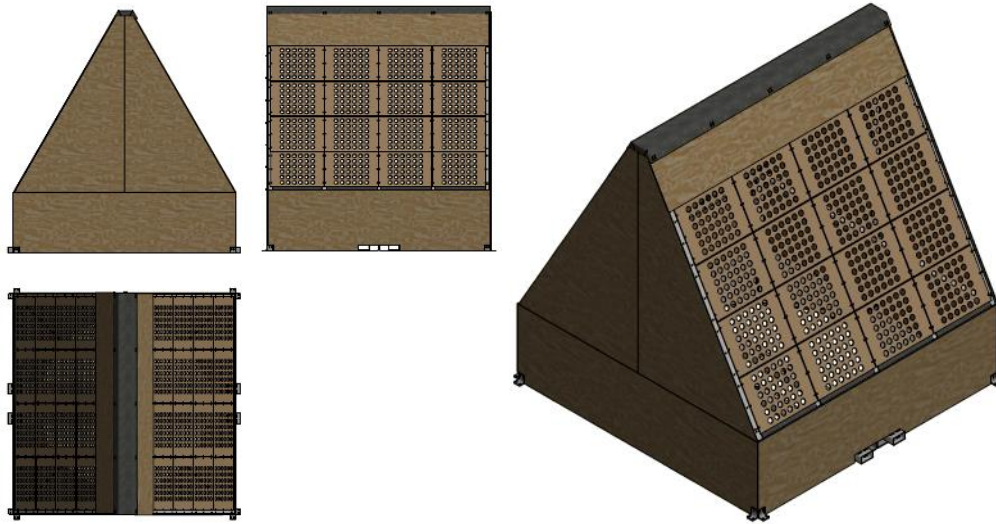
ACC plenum design with perforated plates isometric 3D drawing
